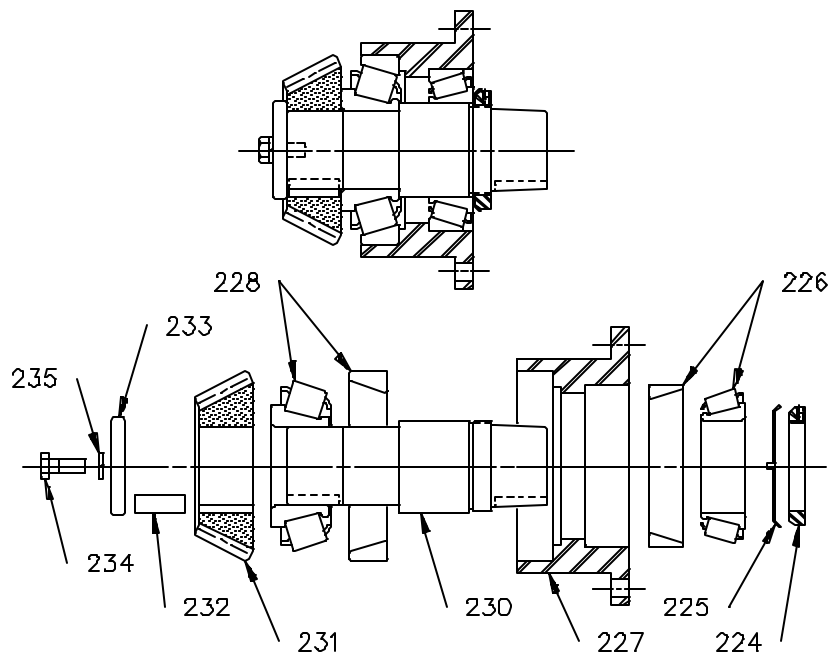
Spiral Bevel Pinion Cartridge Assembly [223]
